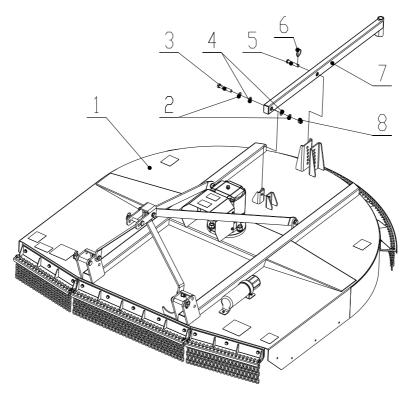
Installing Wheel Frame Weldment and Fittings
